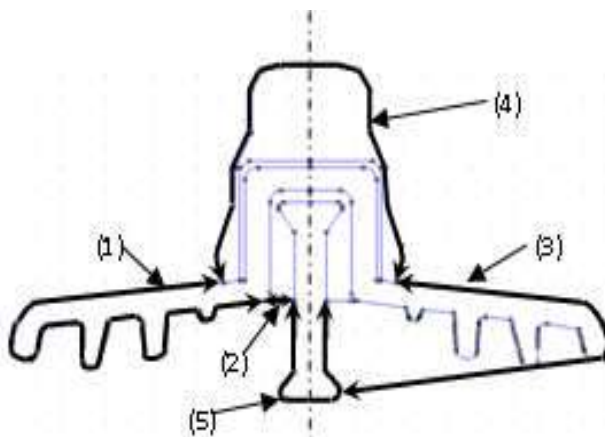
Cap and pin 1512L insulator dimension (Table 1)
